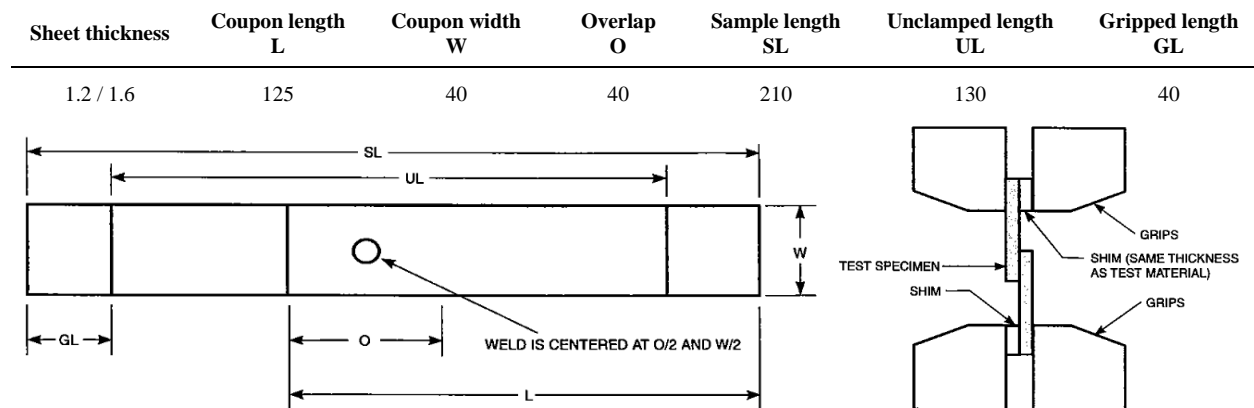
Tensile lap shear assembly geometry and schematic of gripping in the tensile frame. [36]
